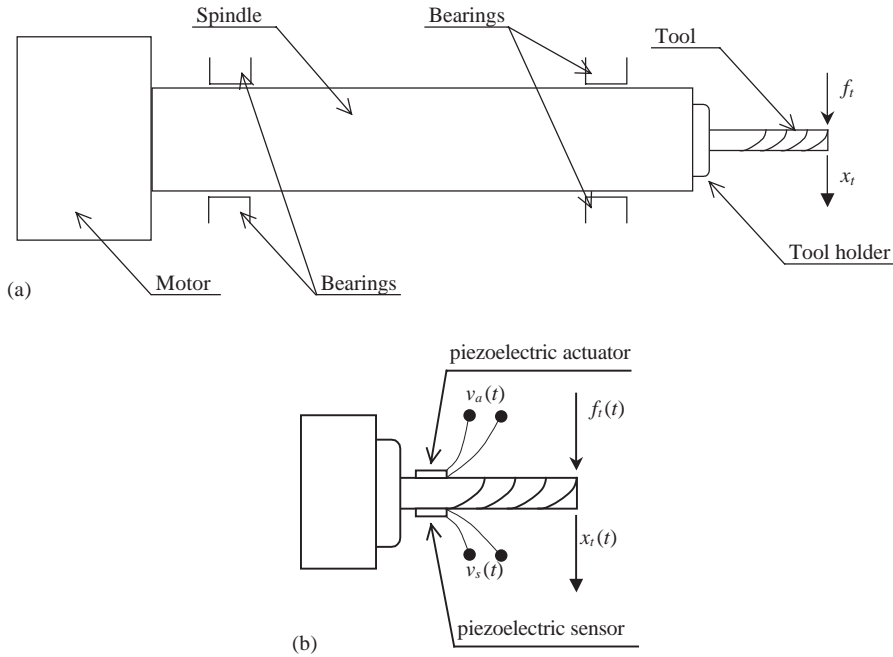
Milling tool and spindle schematic. (a) General arrangement; (b) close-up of the tool with a surface-mounted piezoelectric sensor and actuator.
